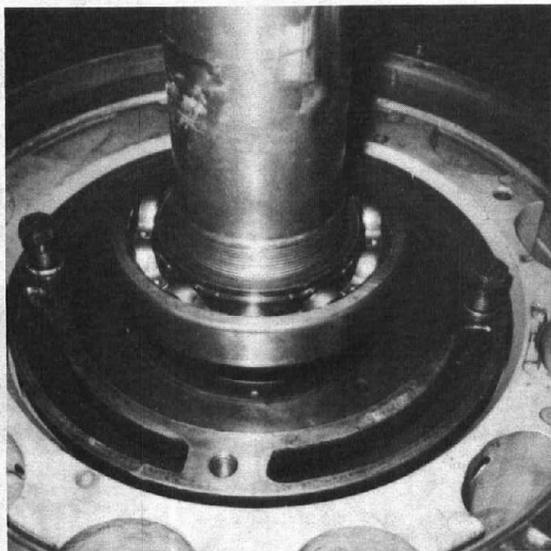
Dynamometer top precision bearing in place following removal of the retainer ring and nut.
